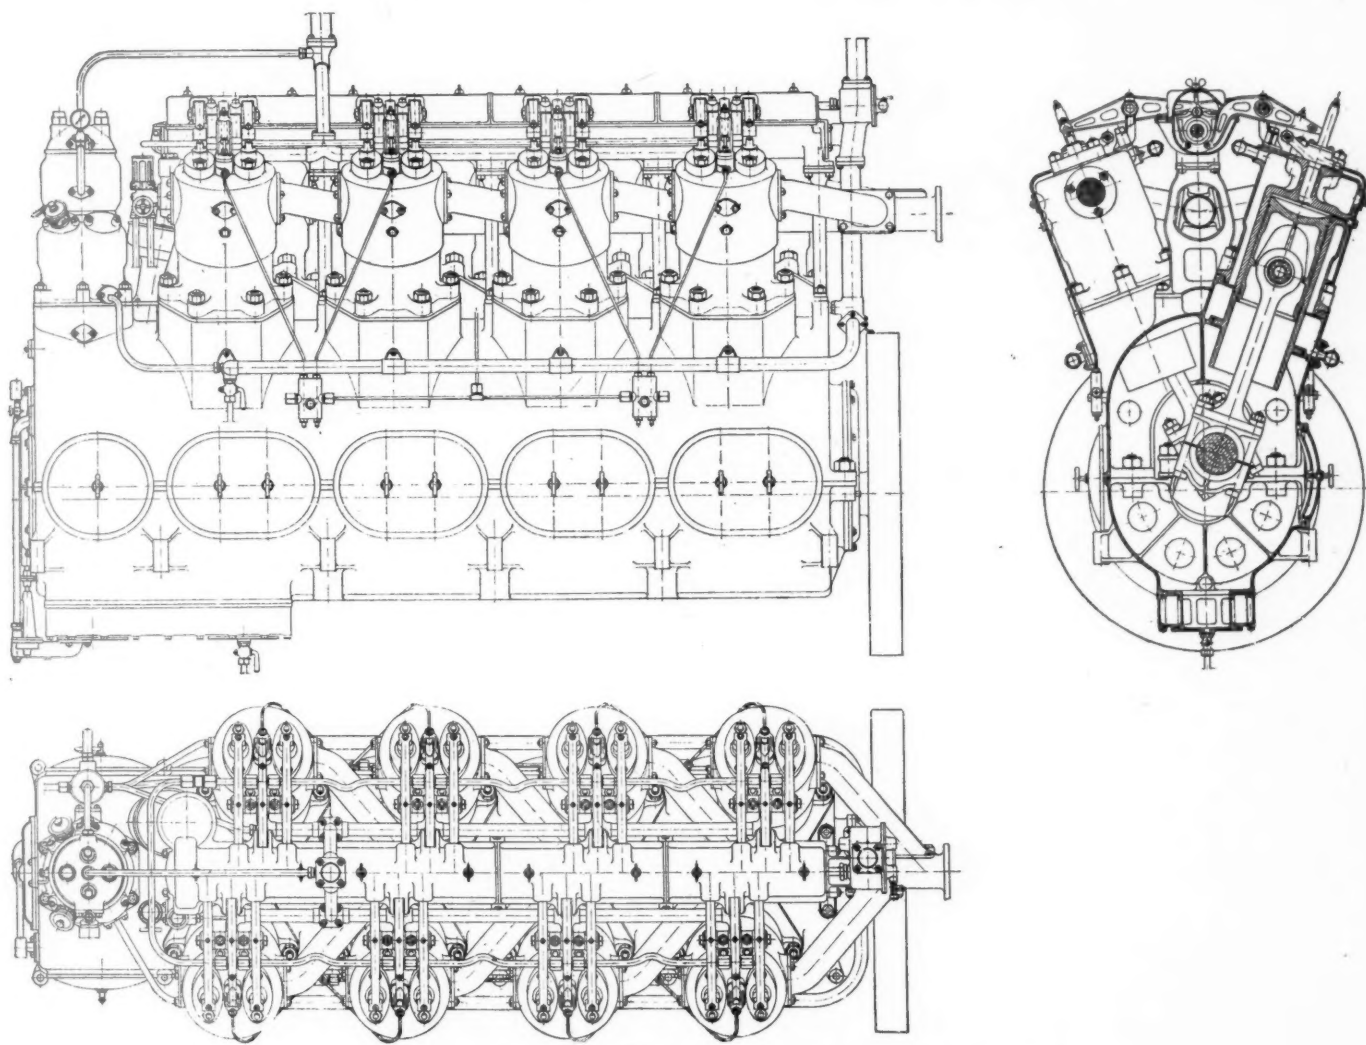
160 H.P. Diesel Engine Designed for Railway Service
